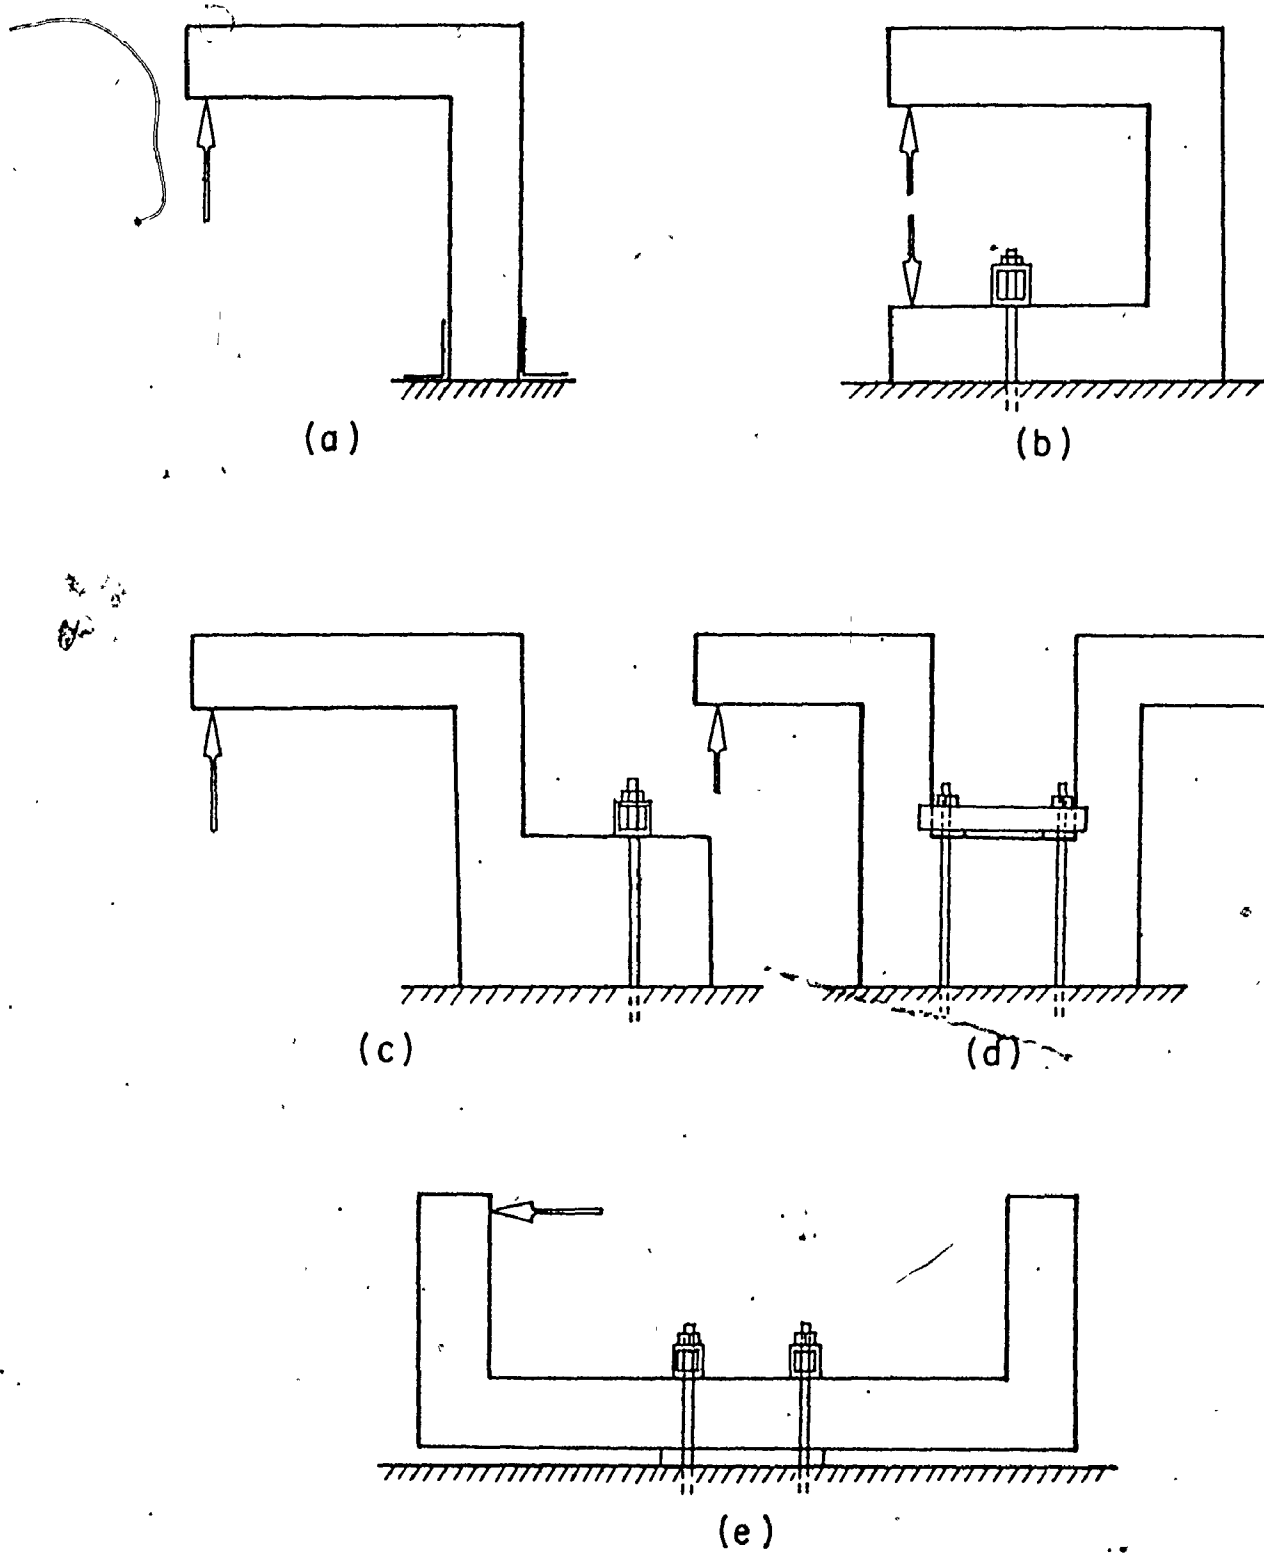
SKETCHES OF POSSIBLE TYPES OF TEST SPECIMENS.
